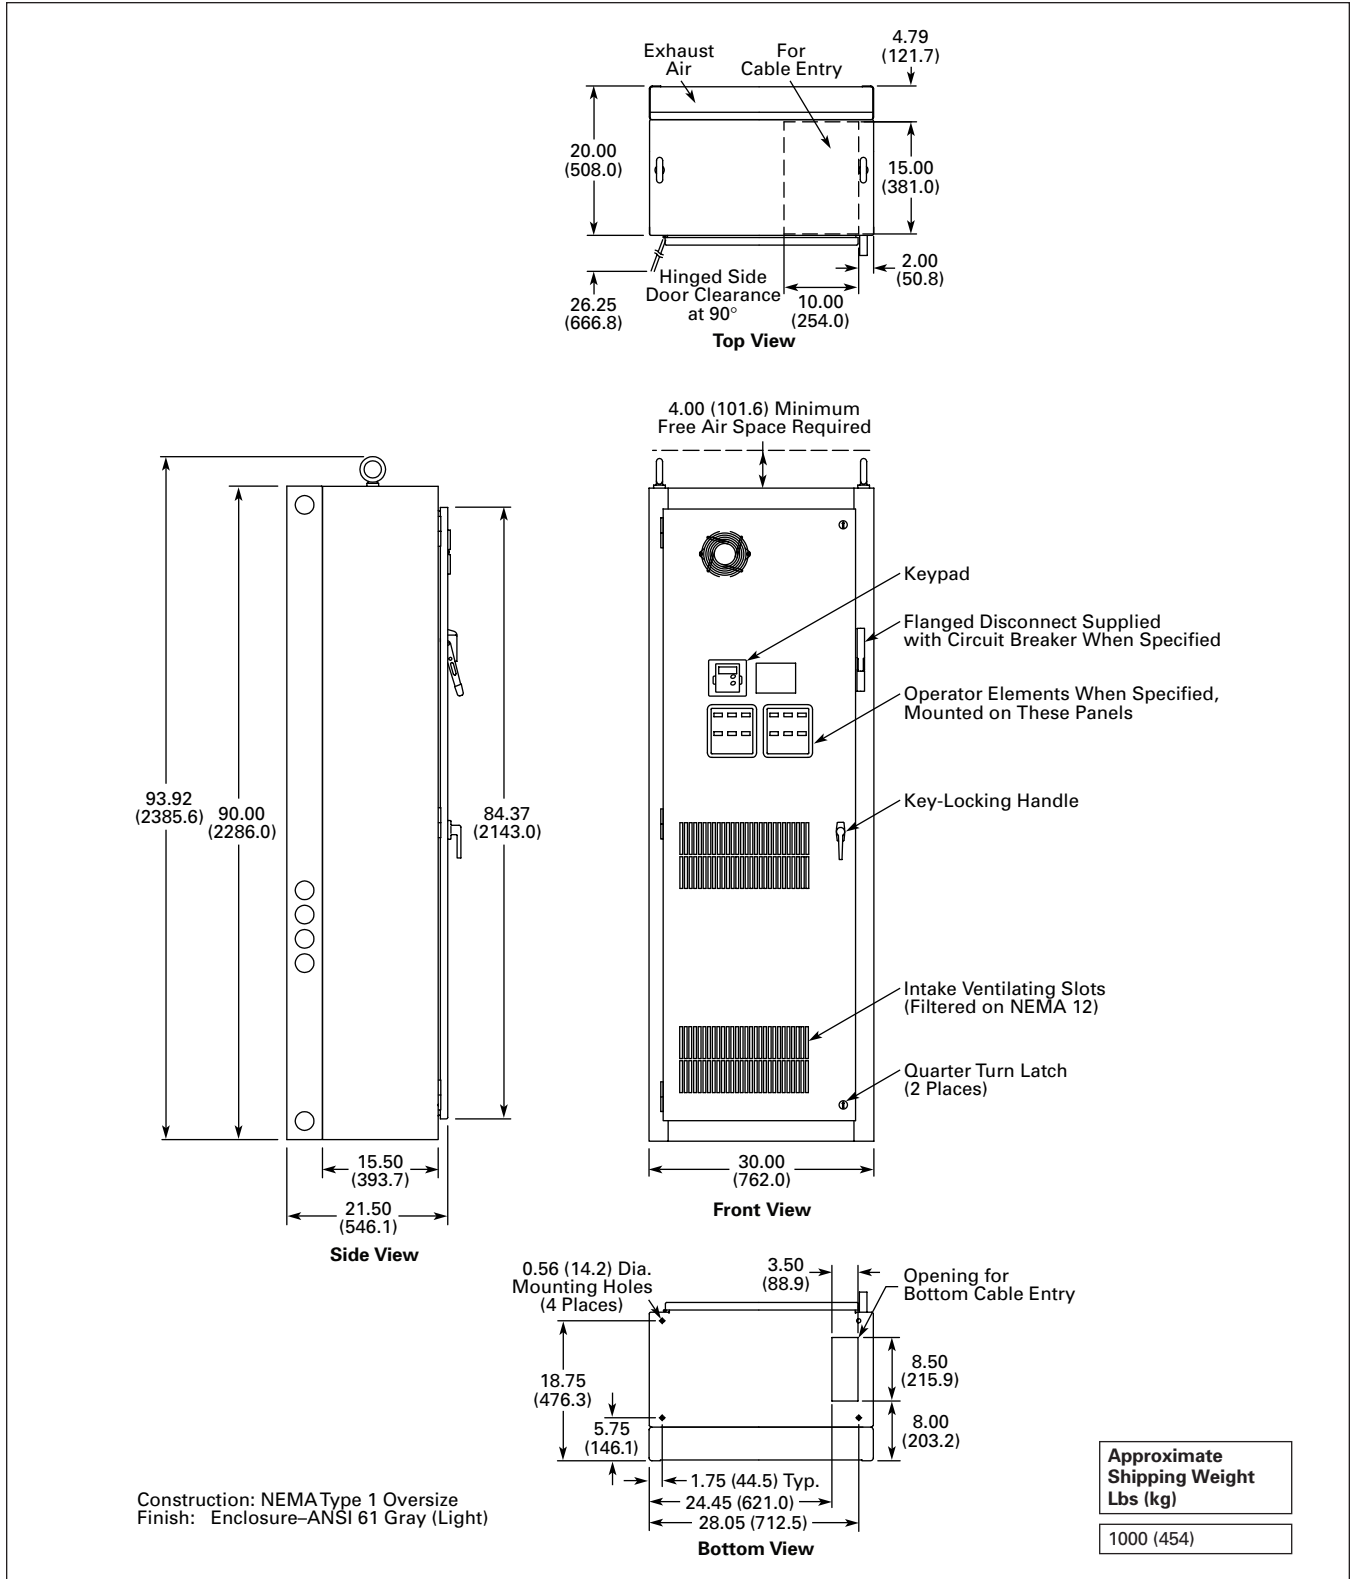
Enclosure Size 7—Approximate Dimensions in Inches (mm)
